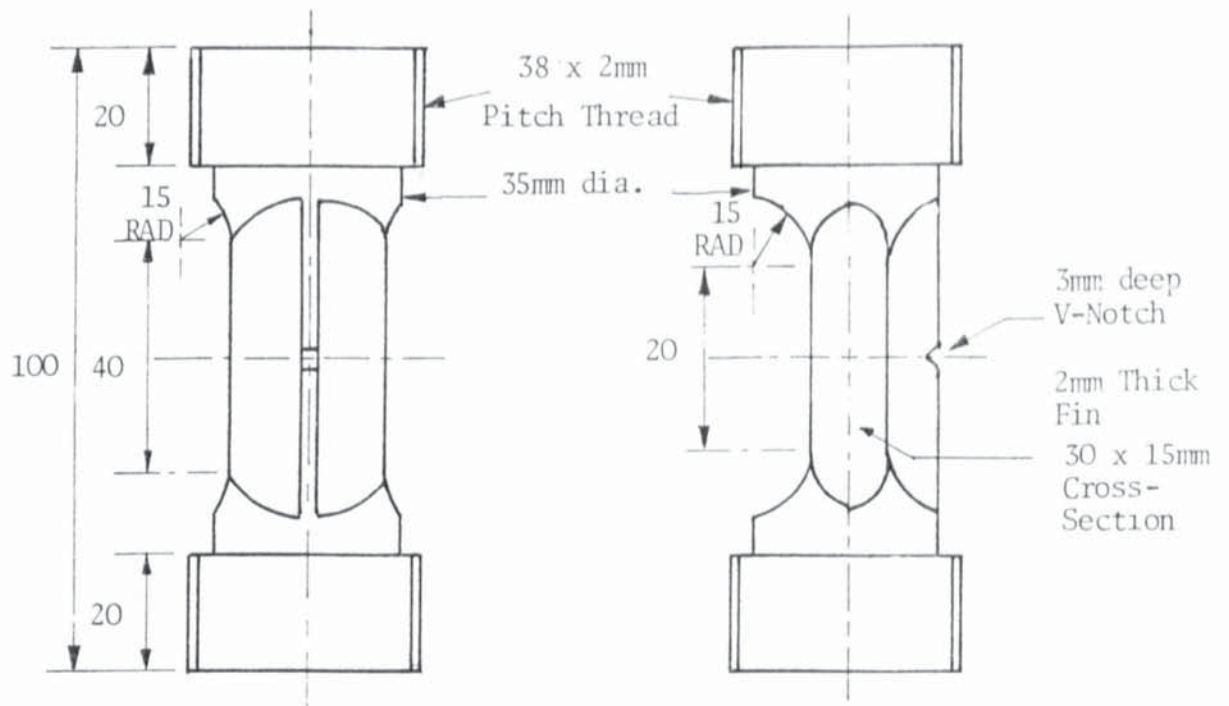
Front-Face Crack Specimen Design (Dimensions mm).
